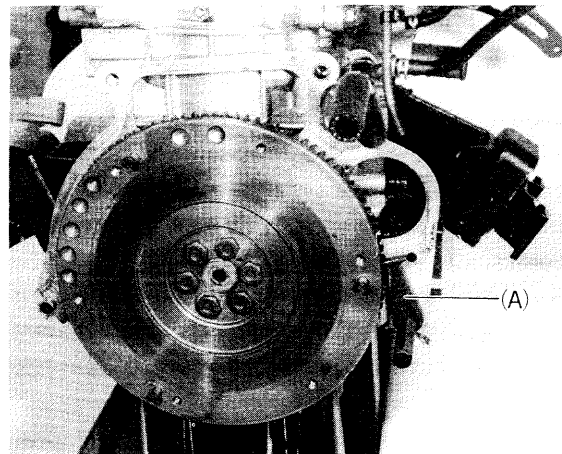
(A) Flywheel holder (Special tool 09924-17810)
